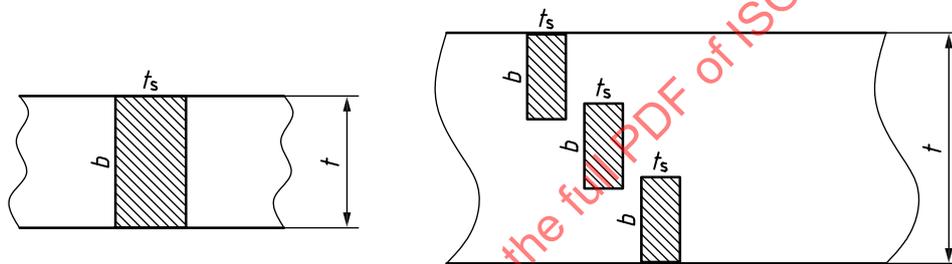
Side bend test specimens for a butt weld (TSBB and SBCB)
